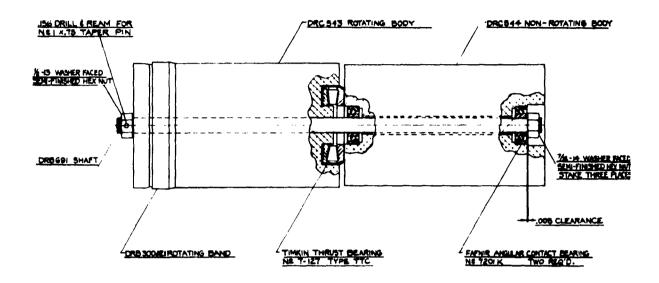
Double Body Test Assembly. Firestone Dwg. No. DRC542.
